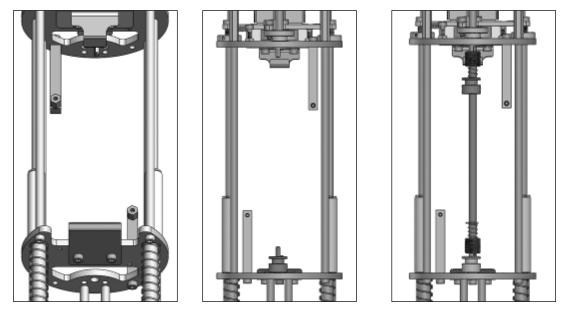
(a-c): Mounting of the accessories for PI NetBox: a) Holding plate for PI NetBox (top view), b) Support rods for industrial PIF (view from the bottom), c) Shaft to fix the PI NetBox (view from the bottom)
